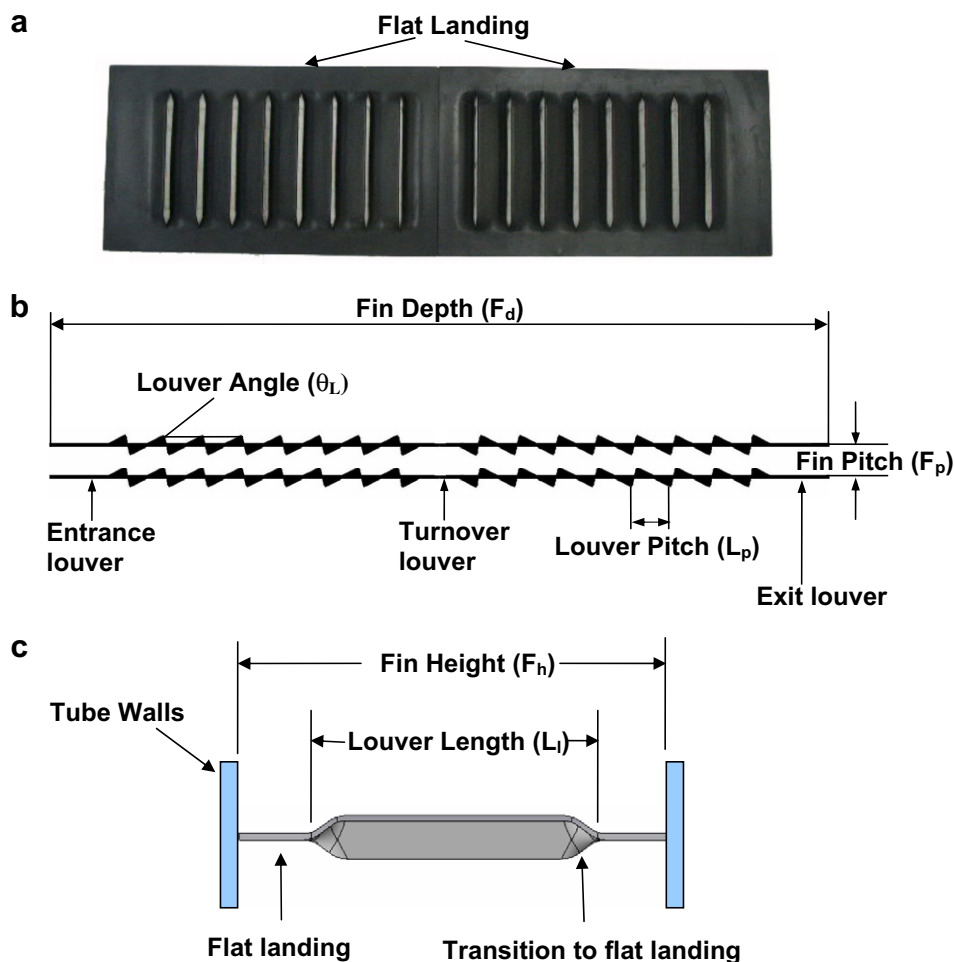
Louvered fin geometry used for testing: (a) picture of the top view, (b) side view, and (c) front view. Note that the fin was molded in two pieces as seen in (a).
